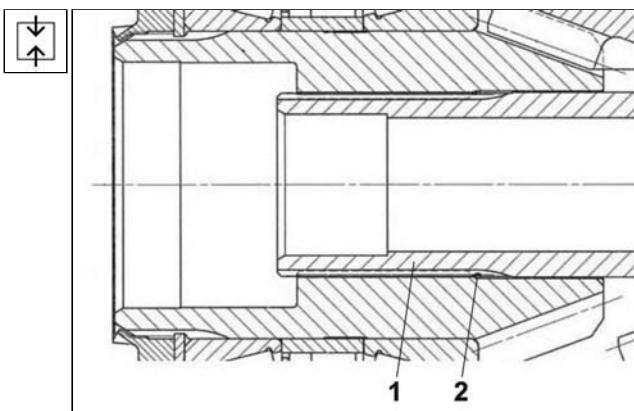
Installation of the propeller shaft into axle final drive housing
